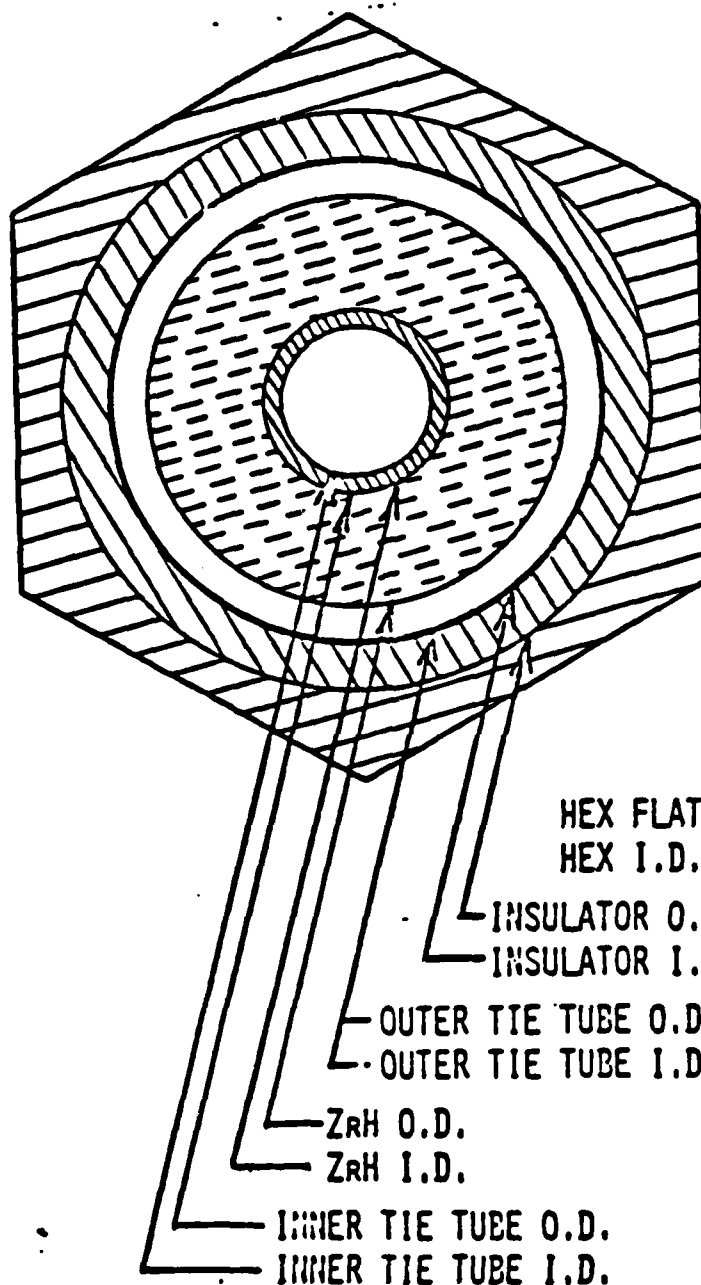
Nuclear engine reactor tie tube and support element geometry.
